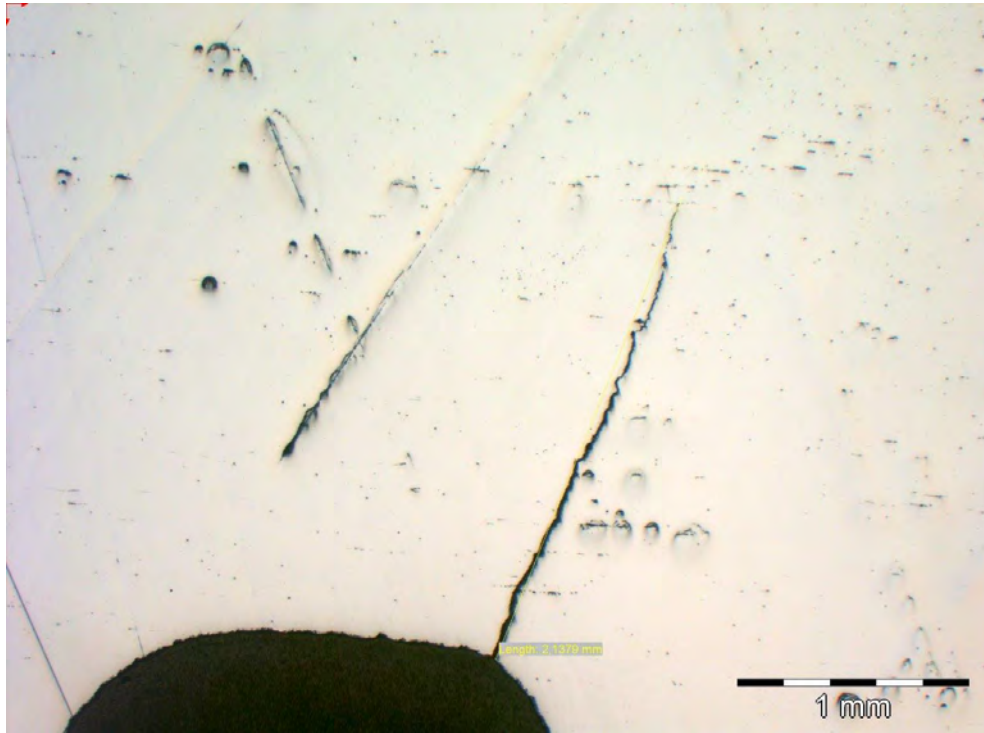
Crack at segment A, first ridge on barrel no. 14389
